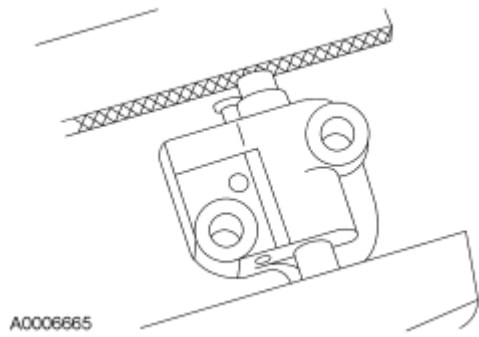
Identifying Chain Tensioner In Soft-Jawed Vise
